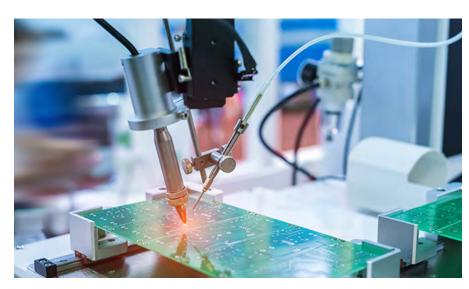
Robotic end effectors can take the form of soldering iron tips to automate the assembly of subcomponents onto PCBs. (Image source: Dreamstime)
